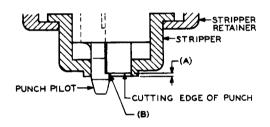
Position of Hole-Enlarging Punch Stripper and Pilot (660A tool shown)
